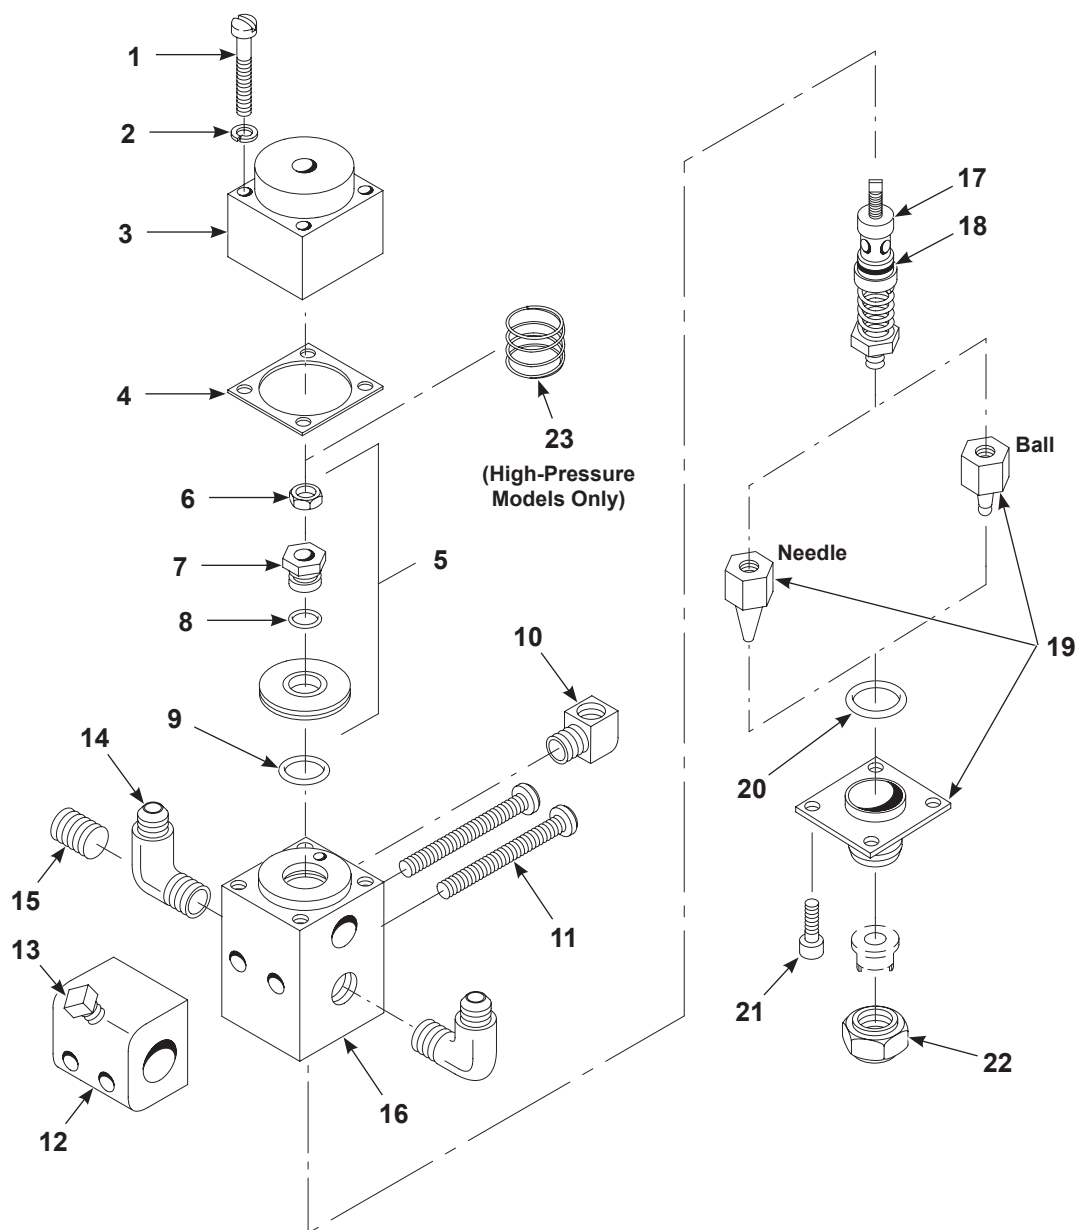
Single Chamber Guns (Except Compound and Extended Valve Guns)
